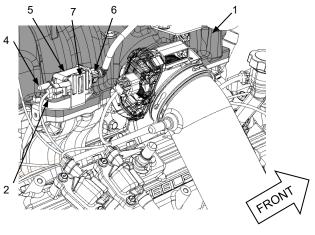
EVAP Purge Solenoid (5), Electrical Connector (2), Hose Connector (4), Solenoid to Intake Line Fitting (6), Bracket Clip (7), Upper Intake Manifold (1)
